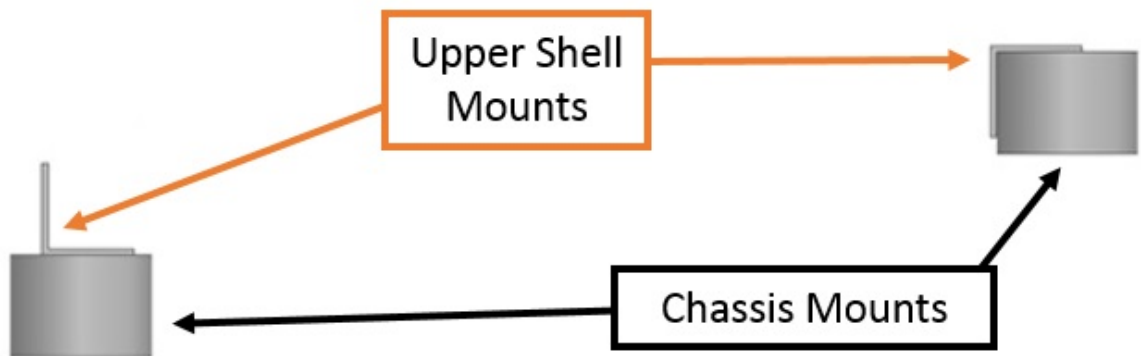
Side view of angle rods placed flush upon square tubing.
